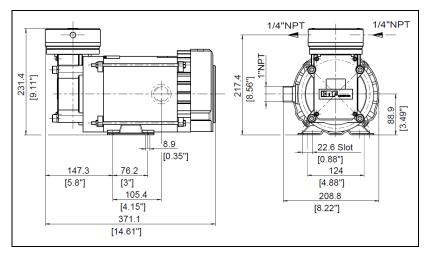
Mounting dimensions UN035S_I EX including .9 versions (All dimensional tolerances conform to DIN ISO 2768-1, Tolerance Class V)
